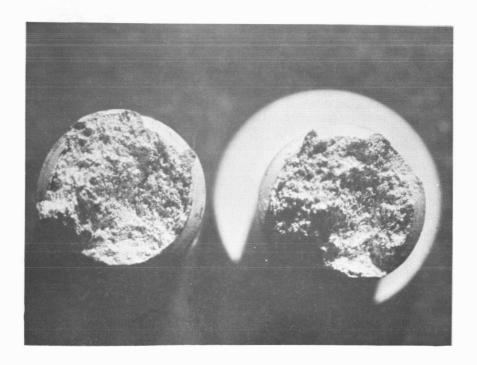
FRACTURE SURFACES, SPECIMEN 2, 8X
